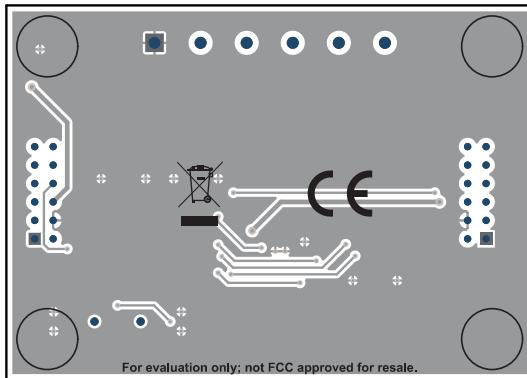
through Figure 6-12 illustrate the PCB layers of the EVM.
